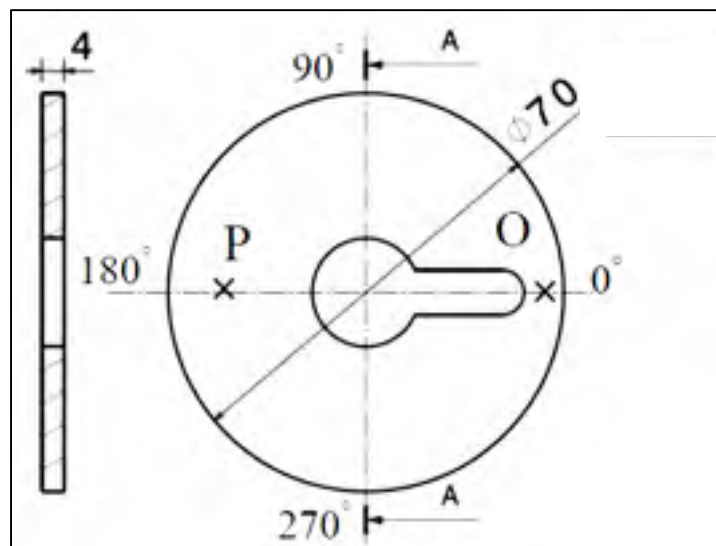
Geometry of the workpiece (all dimensions are in mm)
